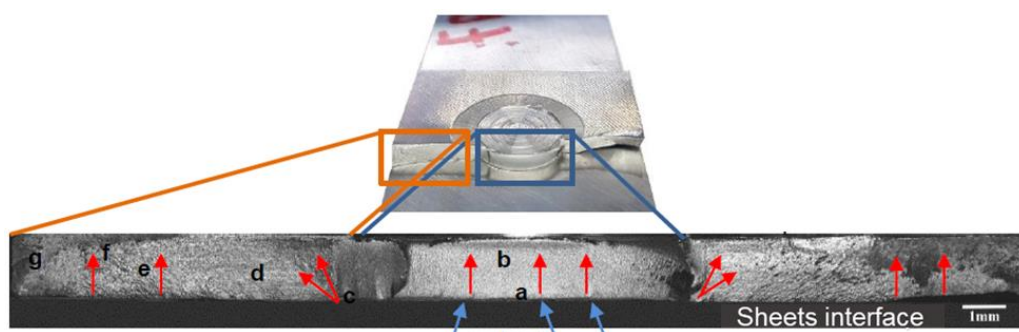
Eyebrow fracture behavior observed in fatigue test samples of Al-Mg-Sc welded by RFSSW [18].
